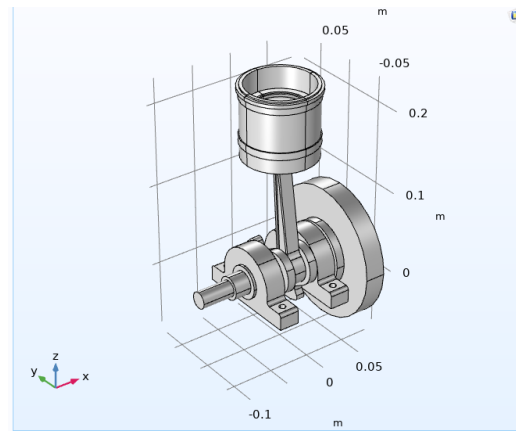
The 3D Model of the Crankshaft-Piston-Cylinder Assembly
